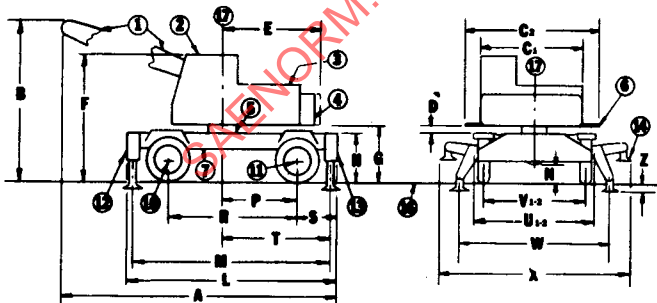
WHEEL MOUNTED, SINGLE OPERATOR STATION
